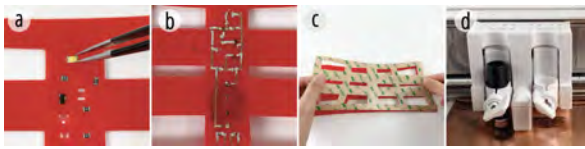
(a) electronics assembly (b) building connections (c) bonding tape (d) cutting heater.
